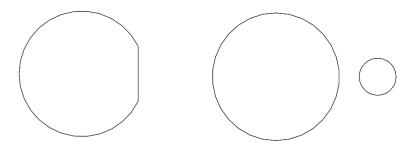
Mounting Hole Layouts, D Hole (Left), Non-Turn Hole (Right)
